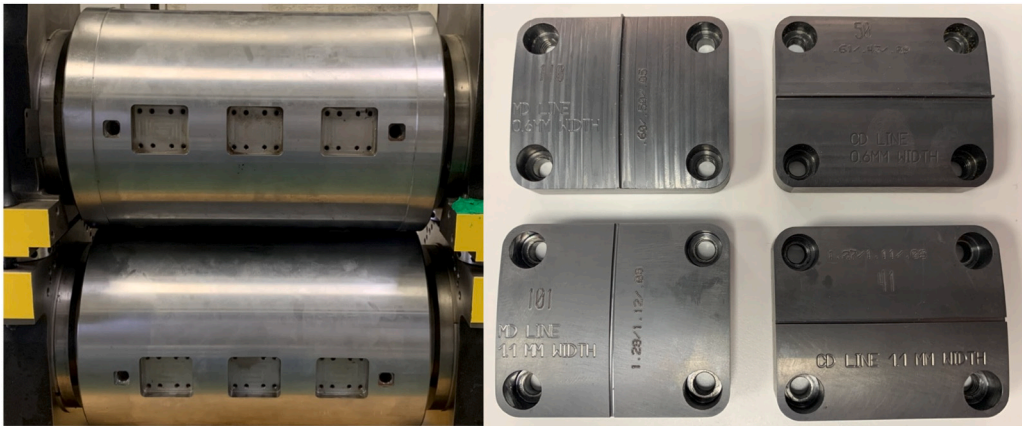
Rotary forming setup including rollers (left) and dies (right).
